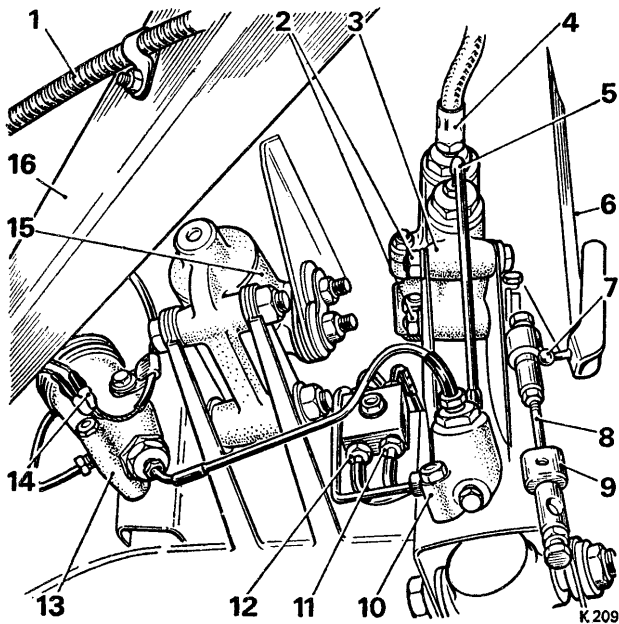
REAR RIGHT-HAND HEIGHT CONTROL VALVE
